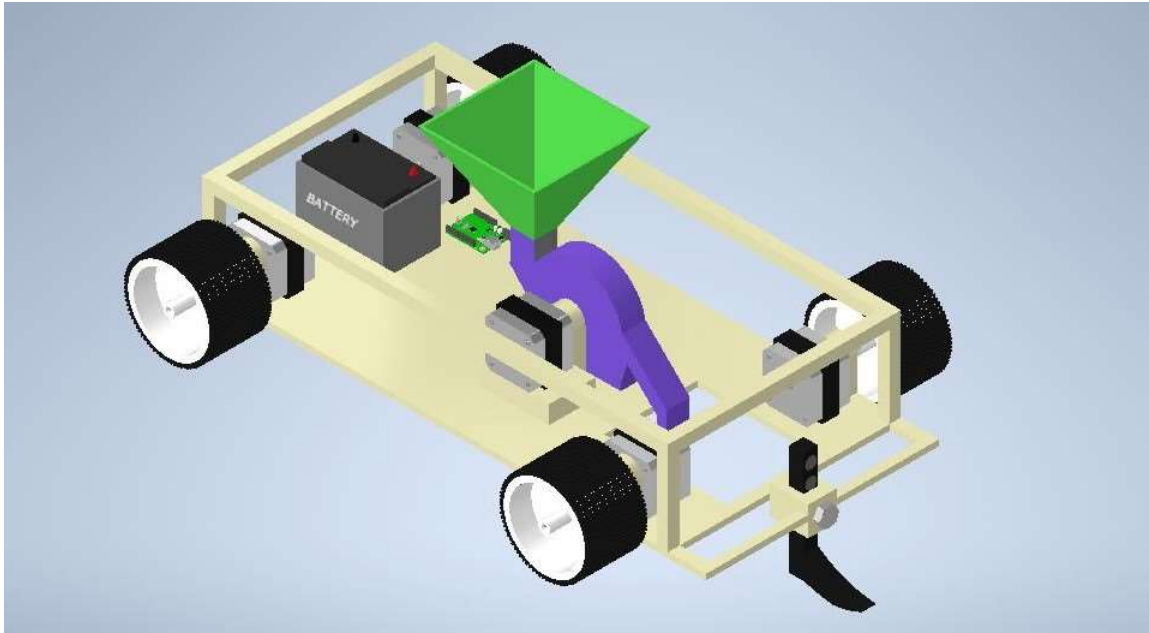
Concept 2 of an automatic seed sowing machine AutoCAD inventor 2024.
